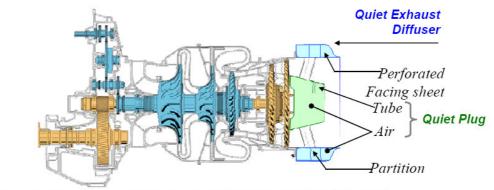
Engine with a quiet plug and a quiet exhaust diffuser (combined)
